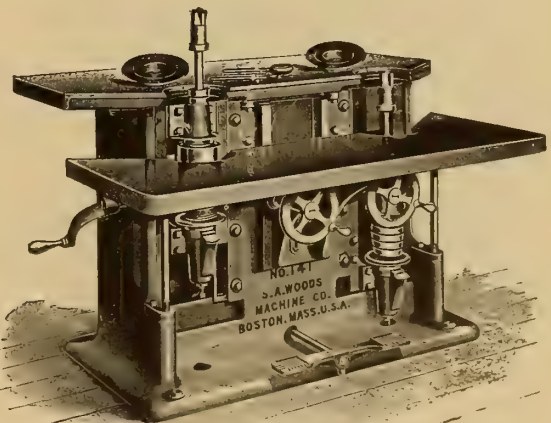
UPRIGHT MOULDING MACHINE, No. 141.
